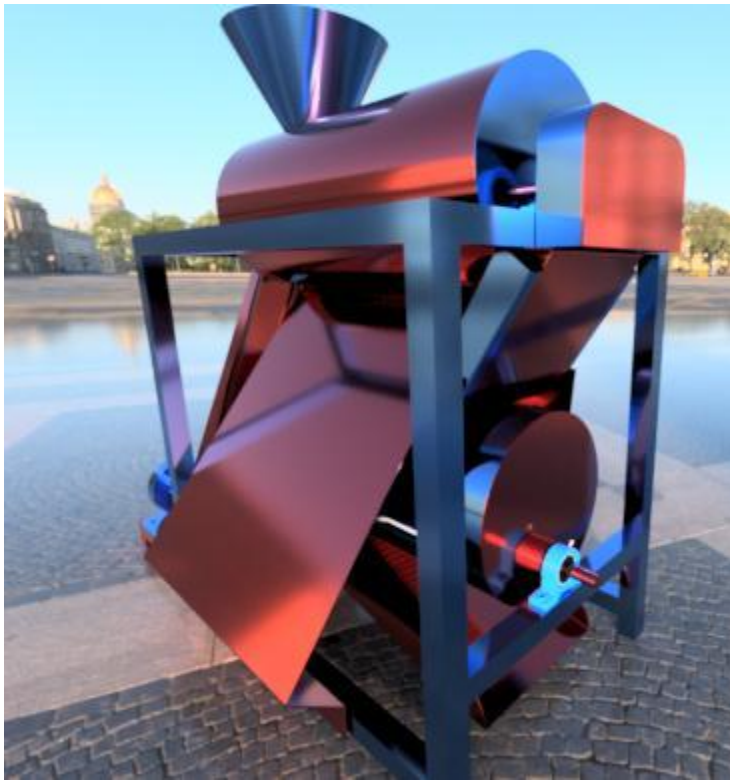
Corn Dehusking and Shelling Machine View 2
